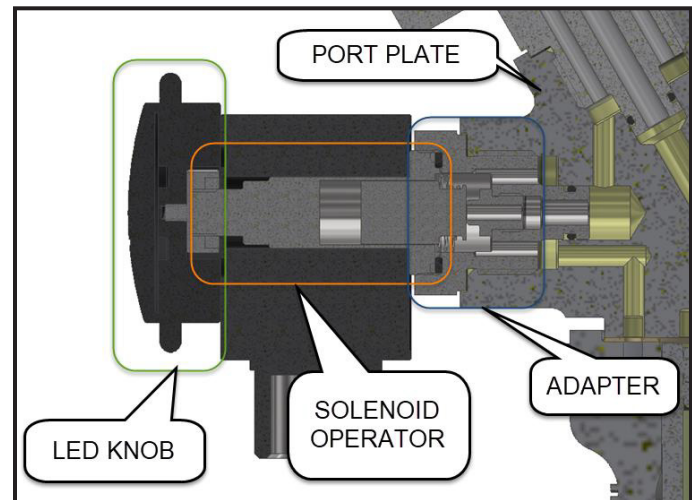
Install and Remove Solenoid Coil over the Solenoid Operator.
